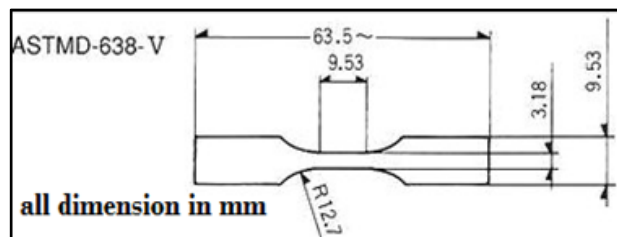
Tensile test specimens and the dimensions for available and suggested material.
